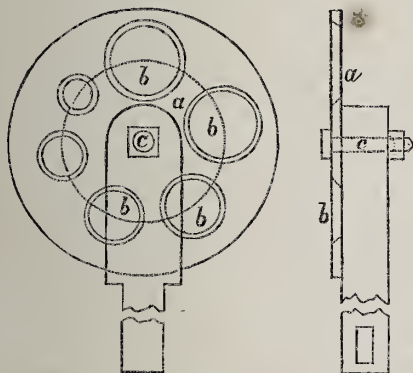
, through which a number of conical holes are bored, whose centres are equidistant from the centre of the plate, so that when the latter is turned on its axis any hole can be brought ex-
